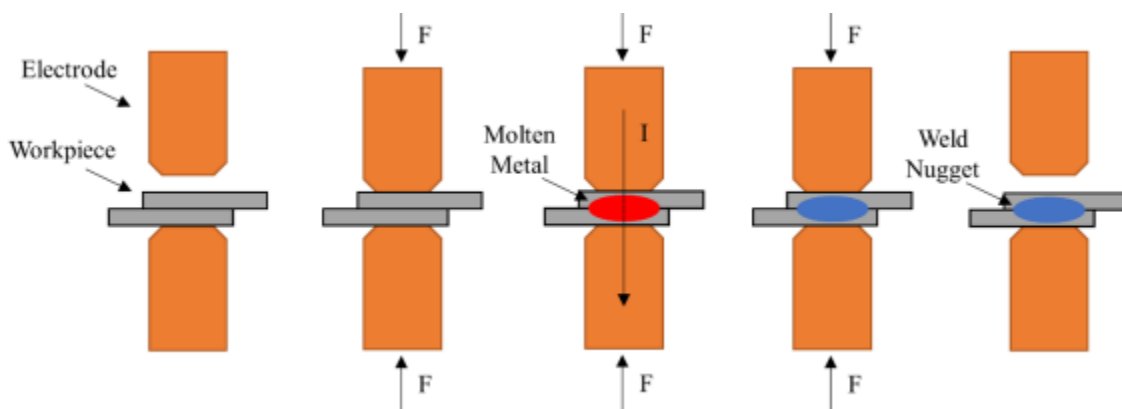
Steps in making a resistance spot weld [22].
